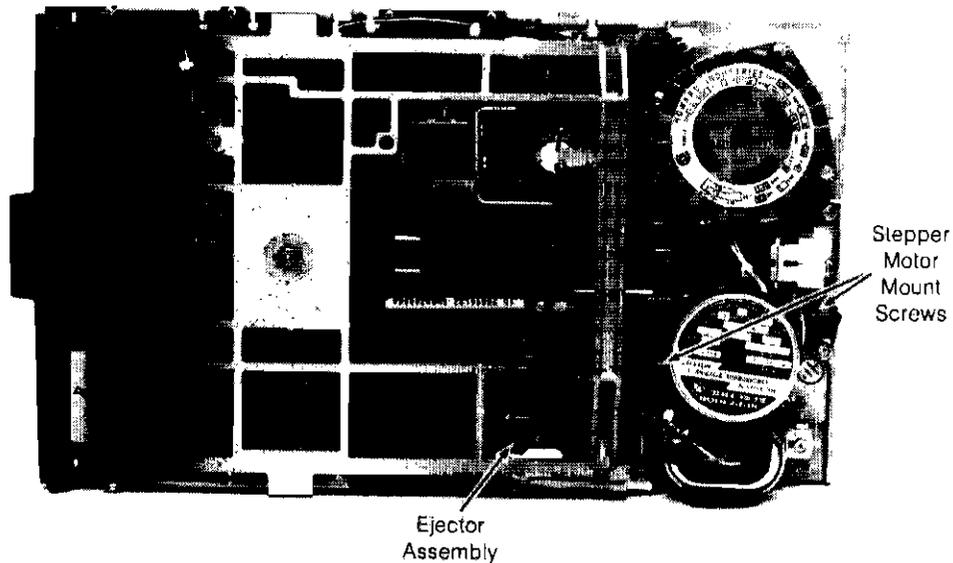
Stepper Motor Mount Screws and Ejector Assembly
